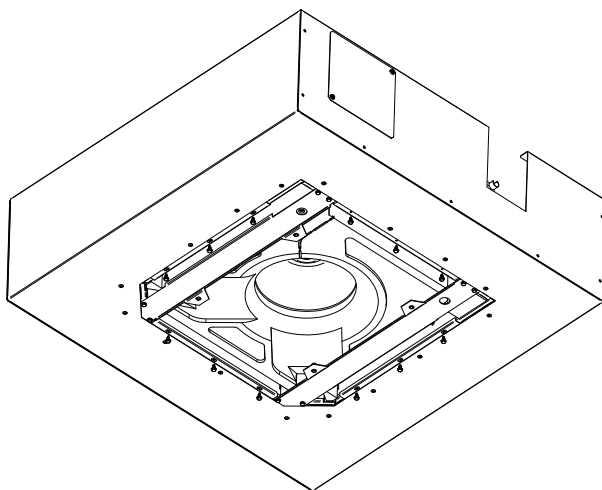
Screw Mounting Locations (Bottom View)
